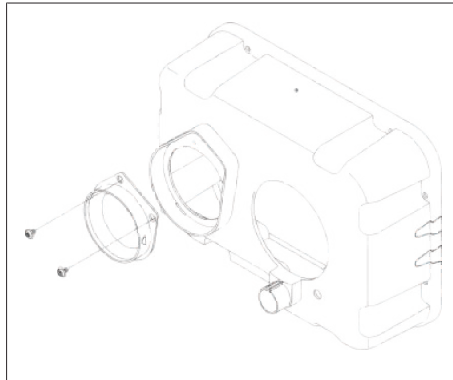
Slightly loosen two T20 screws of cover of heating air blower
